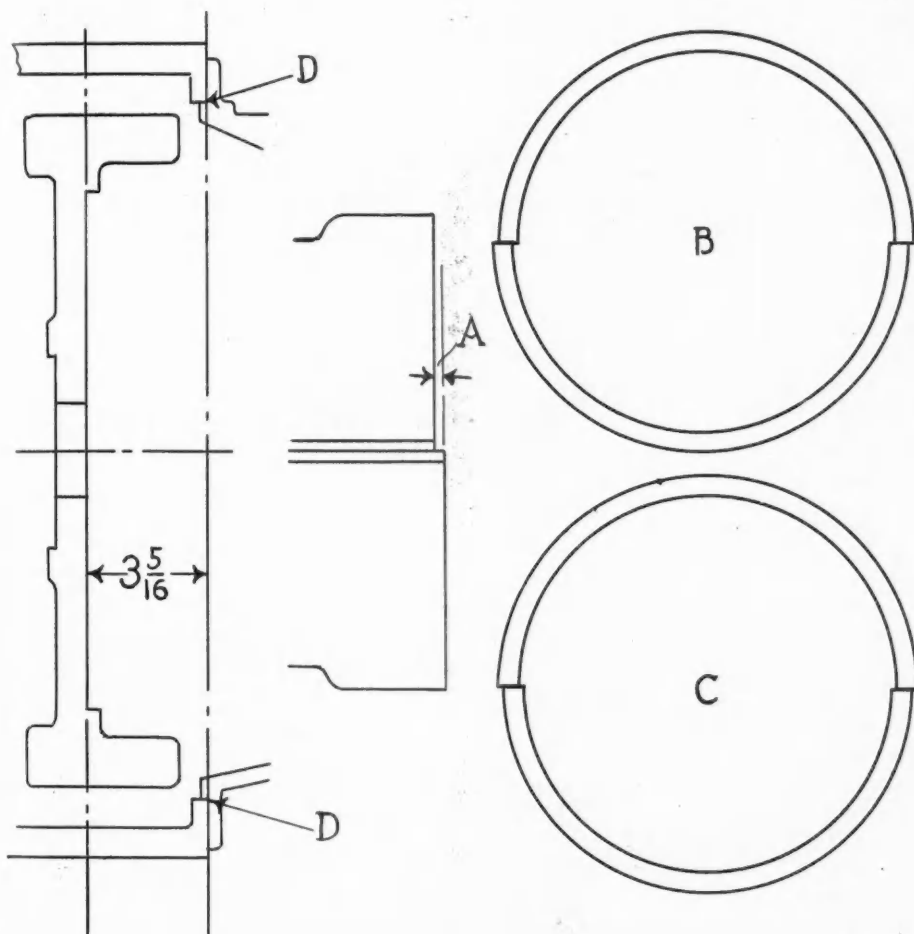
Some things to watch out for when bolting the transmission bell to the flywheel housing. The lower half of the flywheel housing must line up and be exactly the same size as the upper. The bore of the housing, D, should be concentric to .005. The dimension  $3 \frac{5}{16}$  in. is very important and must be strictly maintained. The face of the flywheel should be concentric to .005 and that of the housing .010 in. C shows the upper and lower housings out of line, while at D the lower housing is too small. At A the upper housing is too short compared to the lower.
